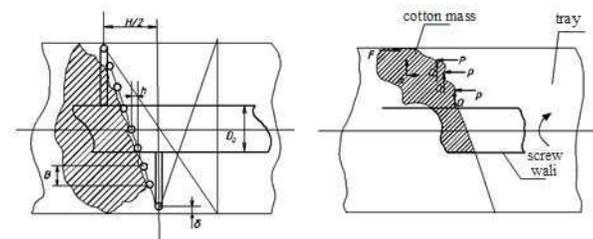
General view of the collector mounted on the end of the auger shaft.
